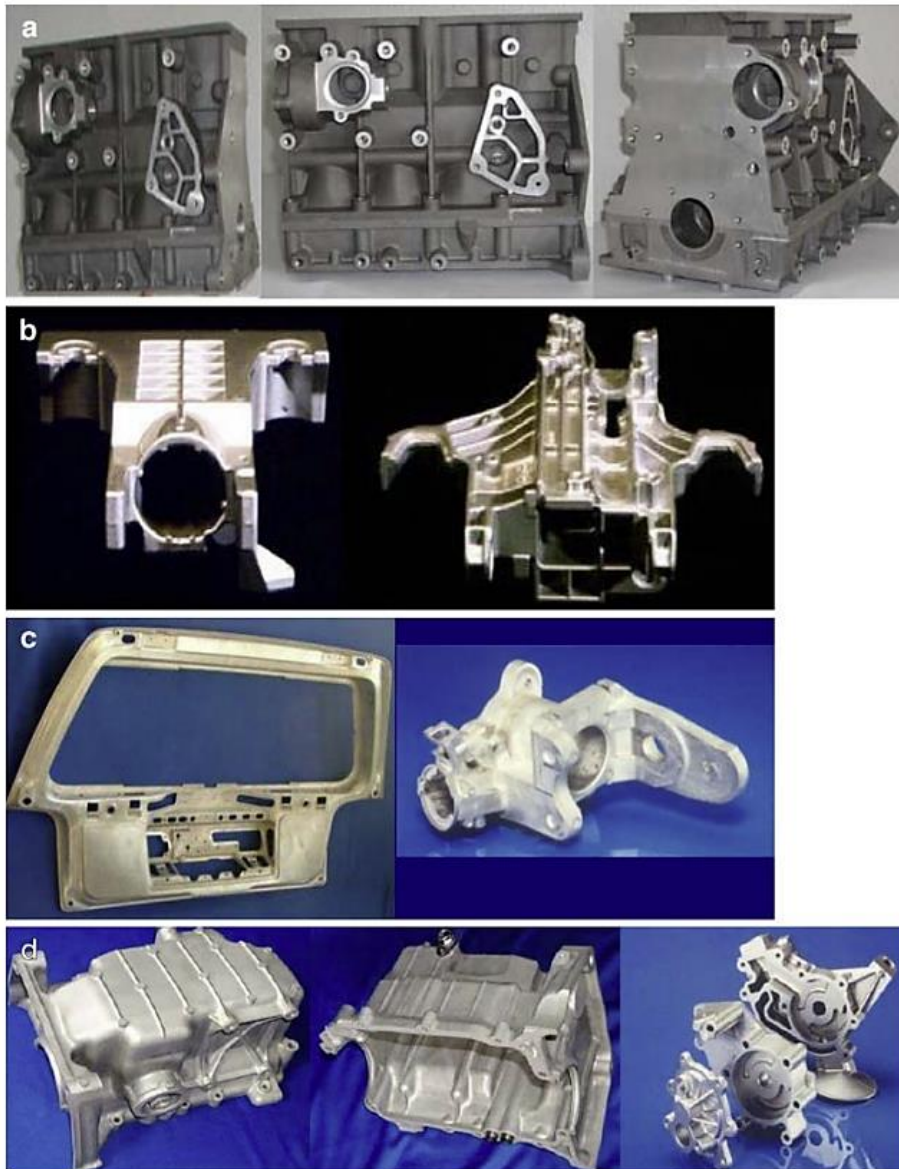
Examples of automotive components made of Magnesium alloys (a- Engine block, b- Steering column module, c- Door frame / Key lock housing, d- Oil pan)
